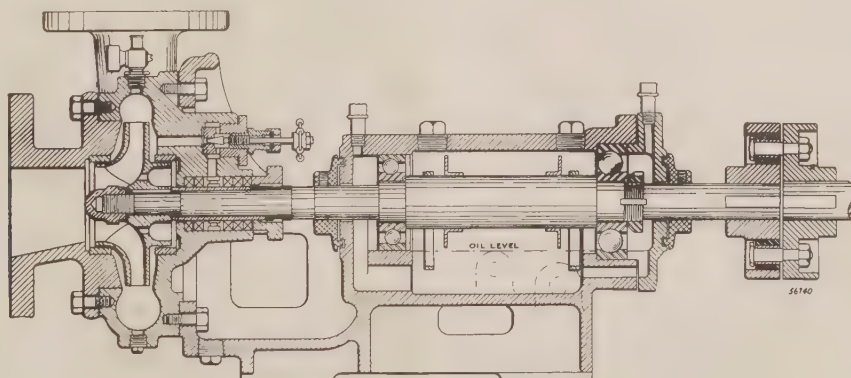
CLOSED-IMPELLER-TYPE PUMP IL11
